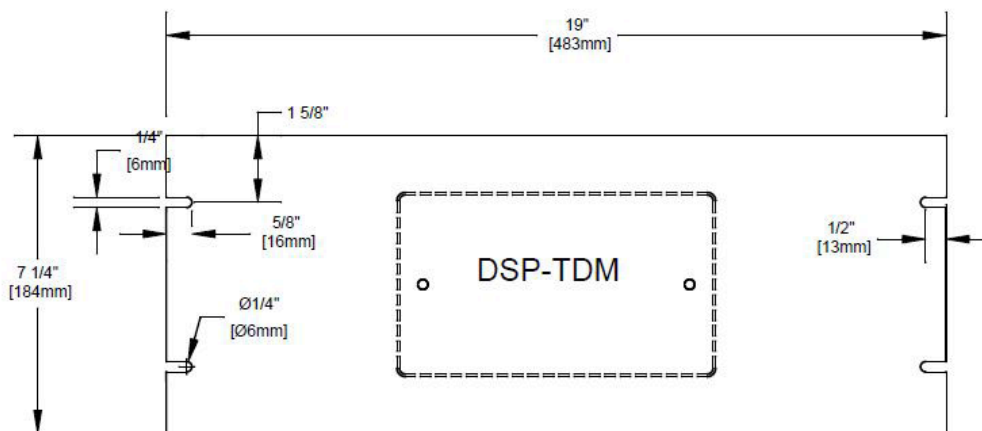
DSP-223-X-TDM - Dimensional Drawing - Front View
